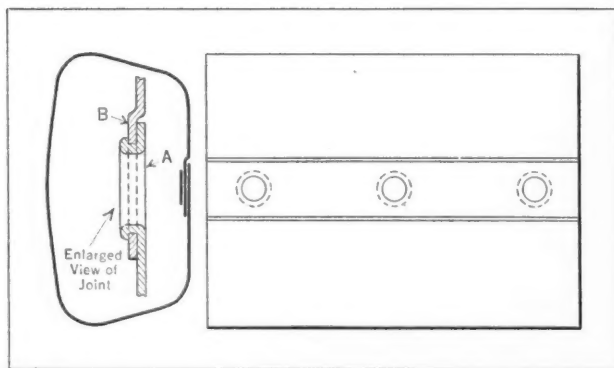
Sheet-metal Casing Riveted in Die Shown in Fig. 3
